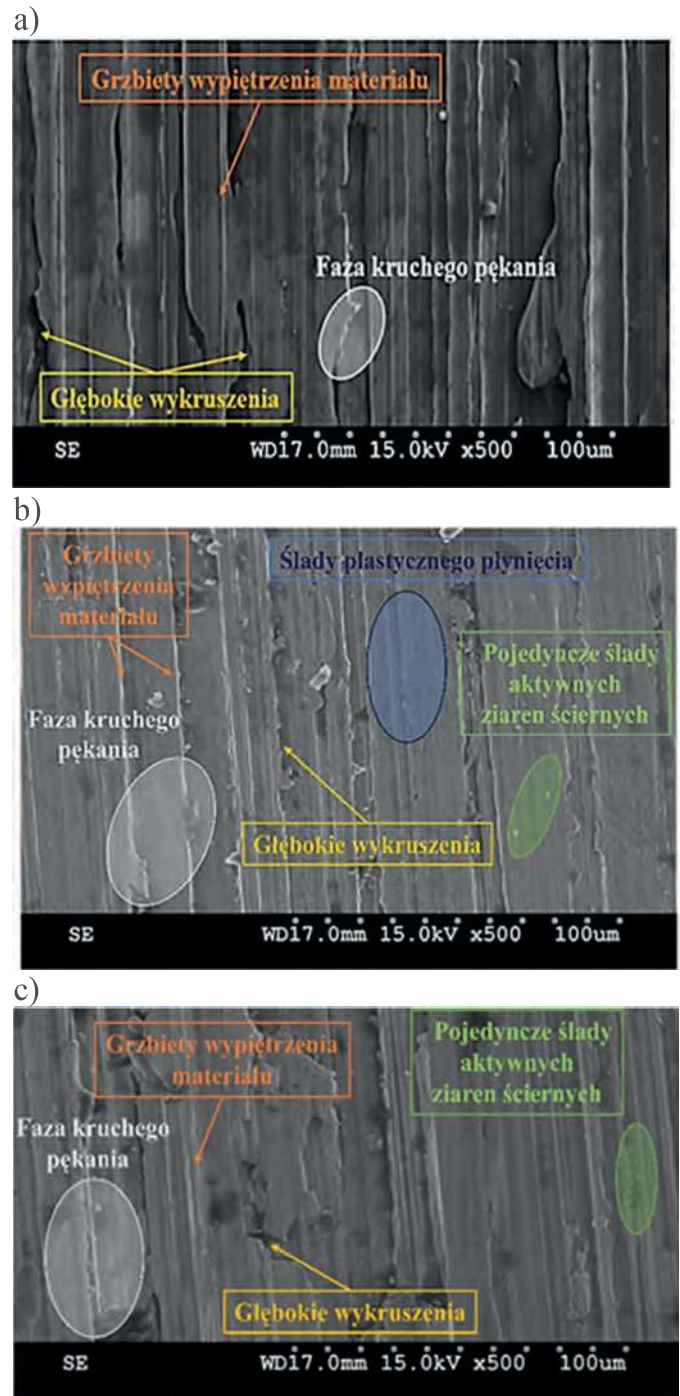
Inconel 625 surface morphology after grinding process with cutting speed: a) $V_c = 33$ m/s, b) $V_c = 23$ m/s, c) $V_c = 13$ m/s (500× magnification)
